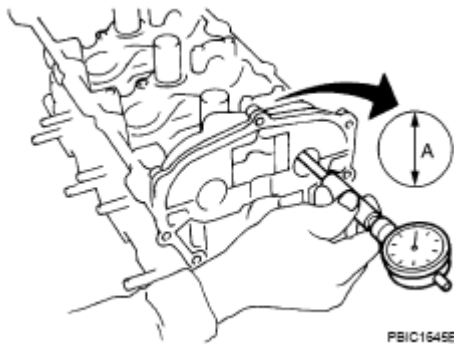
Checking Inner Diameter A Of Camshaft Bracket With Bore Gauge
